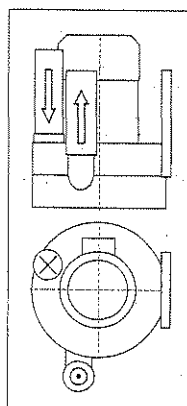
2BH1810 (two-impeller pump-motor unit with a two-stage design)
